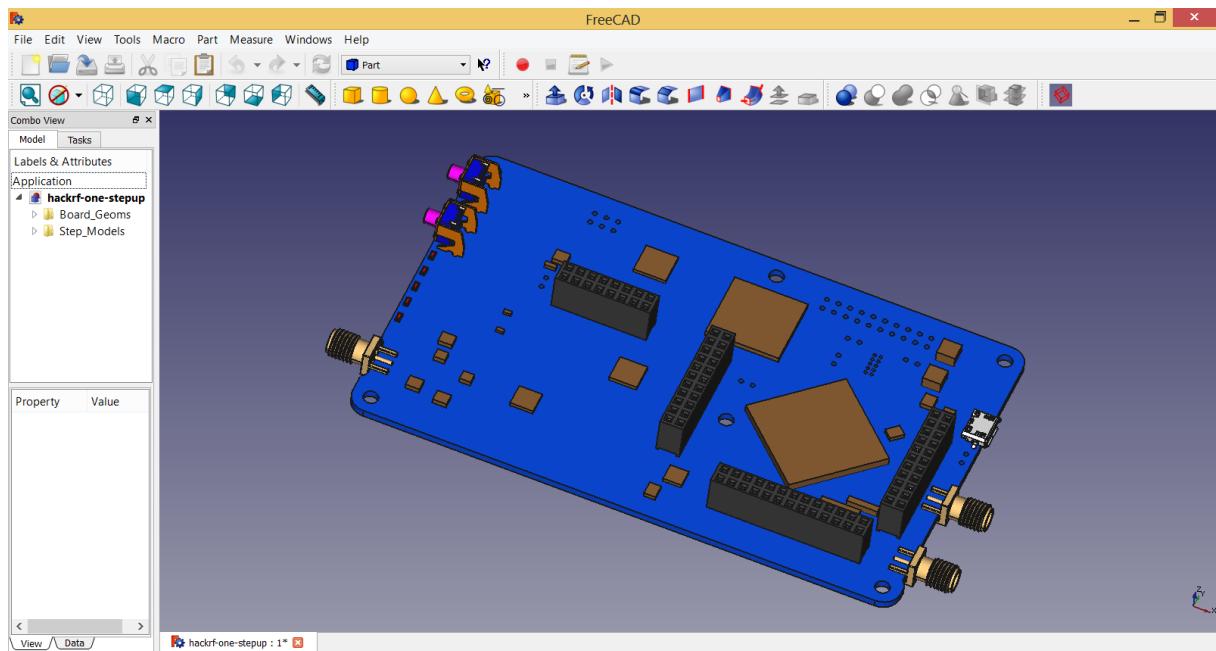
kicad StepUp: using bounding boxes for all but connectors and skipping small parts
